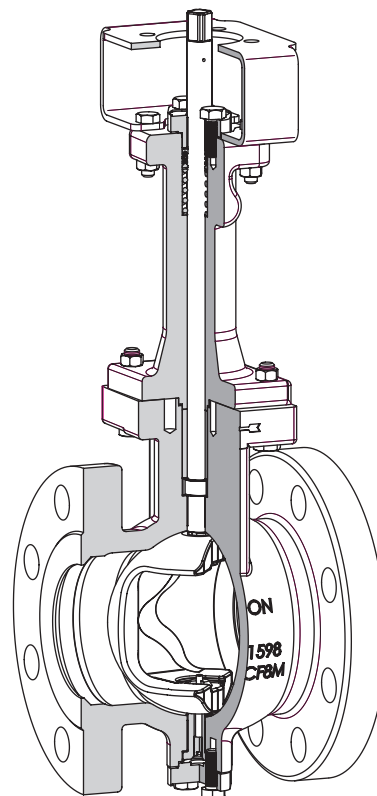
Insulating section for Type 3310 Segmented Ball Valve
